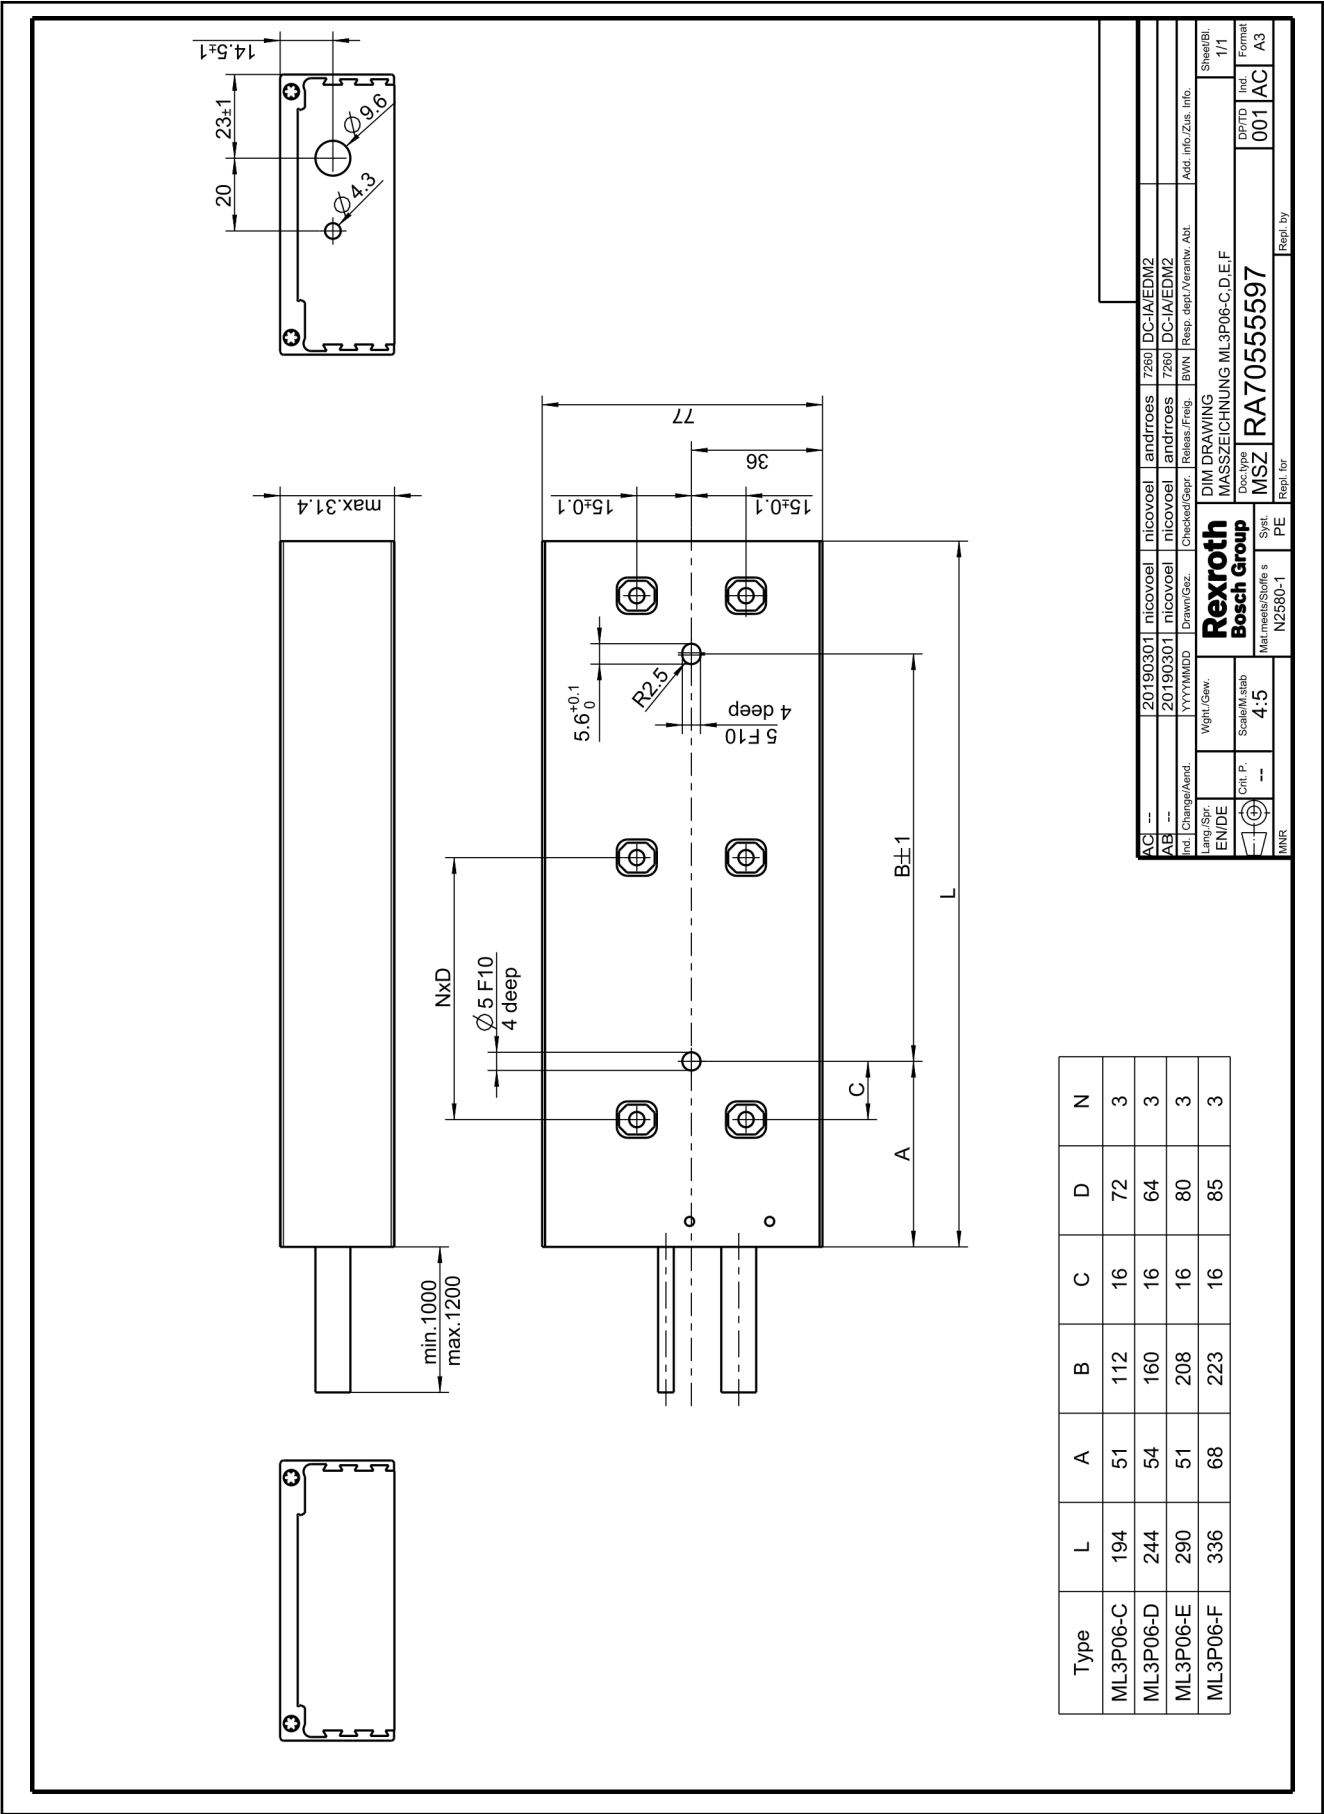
Dimension sheet primary part ML3P06-C/D/E/F
